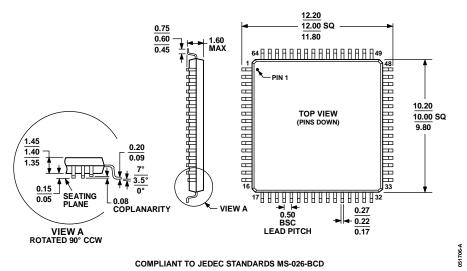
64-Lead Low Profile Quad Flat Package [LQFP] (ST-64-2) Dimensions shown in millimeters
